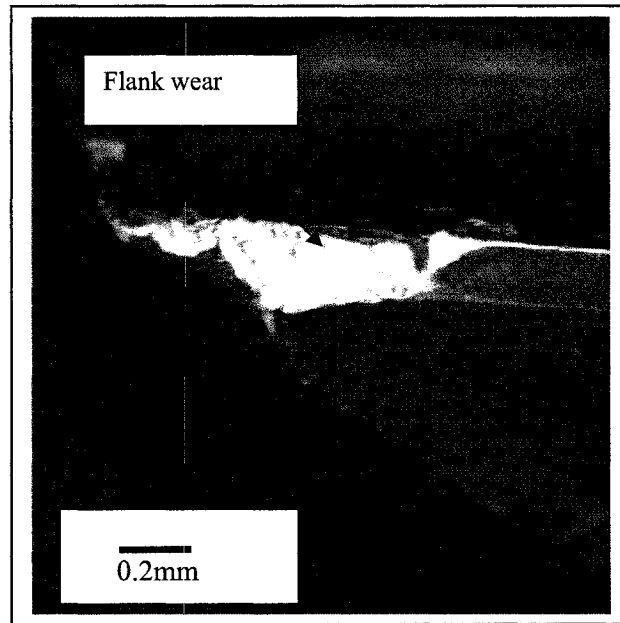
Wear surface, cutting speed= 90 m/min (1505 rpm), depth of cut = 1.6 mm , feed = 0.025 mm/tooth, stable cut
